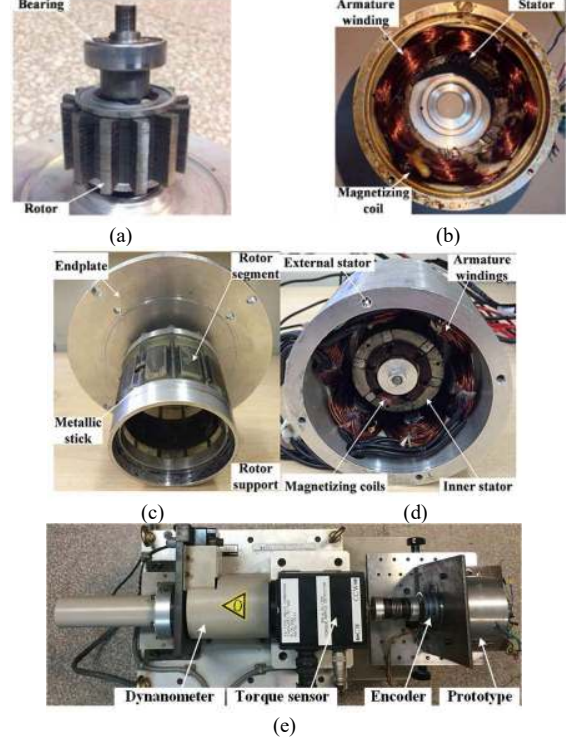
The manufactured prototypes of the SFMMs: (a) Rotor (SS). (b) Stator (SS). (c) Rotor assembly (DS). (d) Stator (DS). (e) Test rig.
